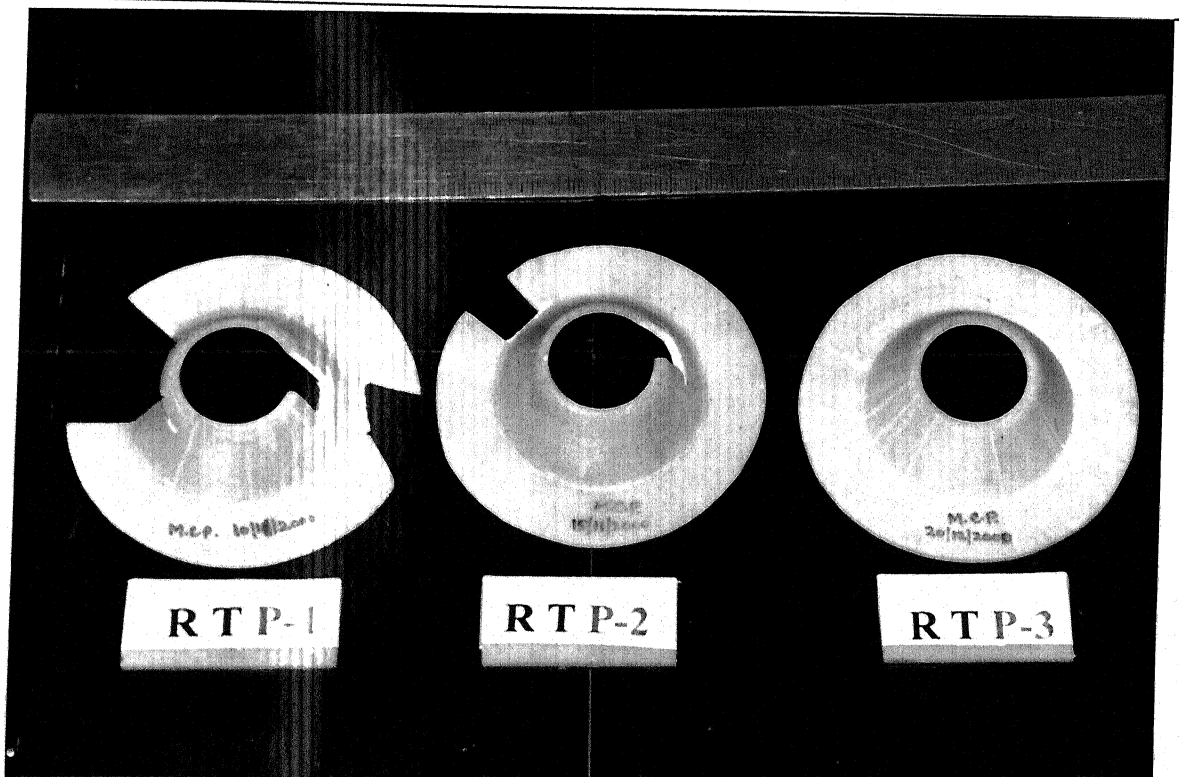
Rapid Tooling Products (cut portions indicate the parts used for making specimens for burn test and optical microscopy)
